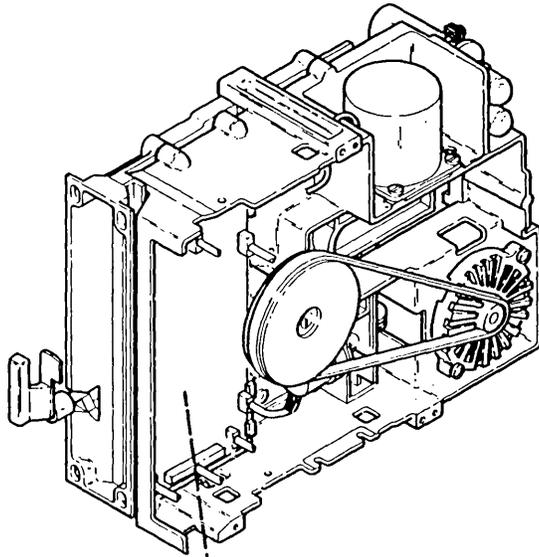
(Part 2 of 4). Diskette Drive Parts
